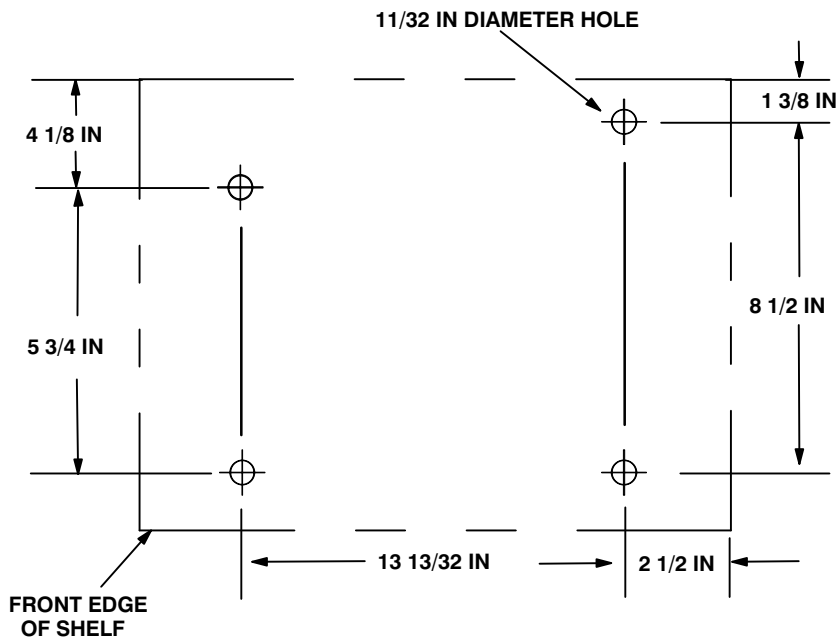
(1). Mounting Base Installation: Drilling Dimensions
